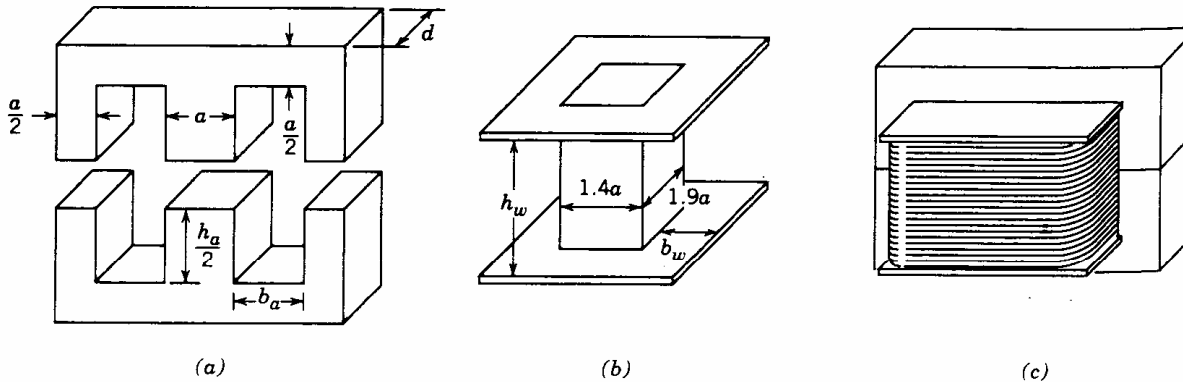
Dimensioned diagram of (a) a double-E core (b) bobbin, and (c) assembled core with winding.
